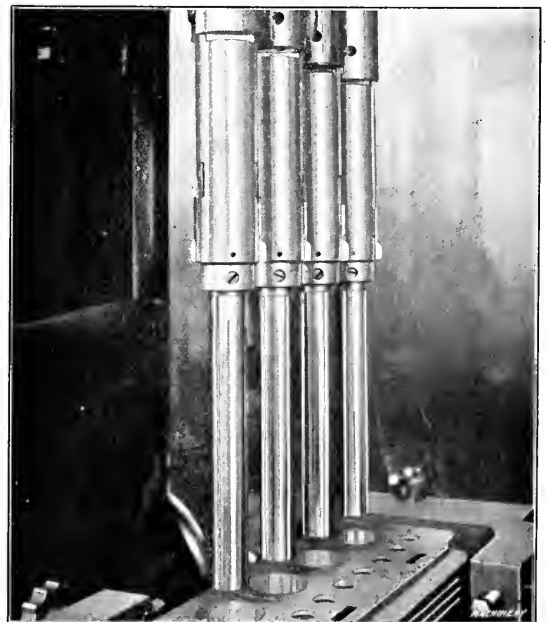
Close View of the Kelly Boring Tools used for roughing out the Cylinder Bore
